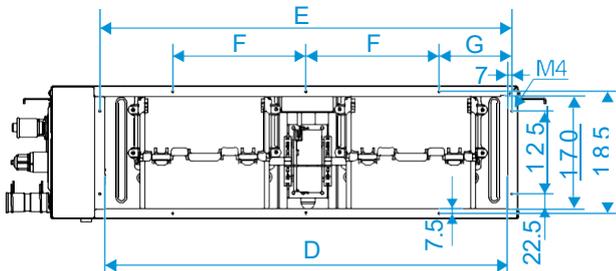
External dimension, air outlet size, and size of fresh air outlet: (unit: mm)
